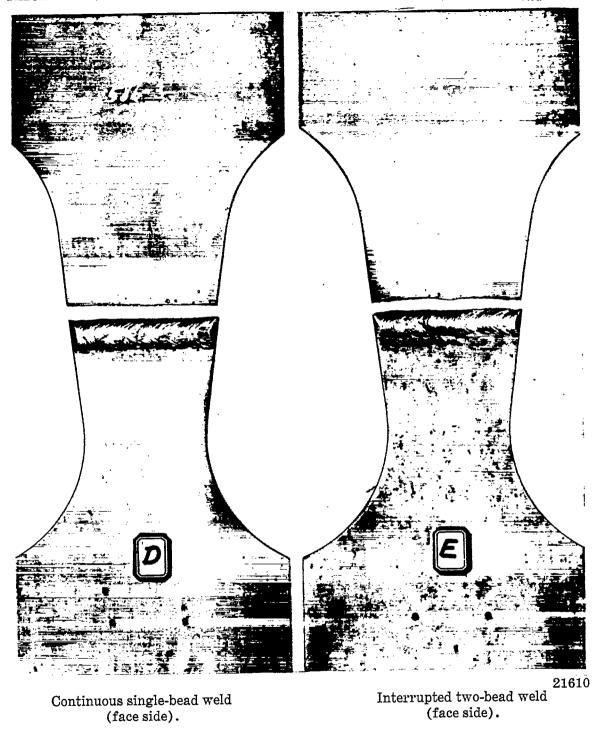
Typical plate-bending fatigue fractures at toe of weld bead (face-weld views).
